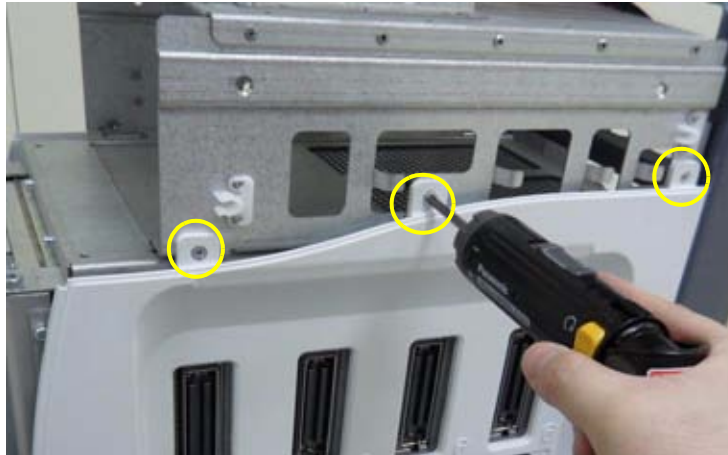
Unscrew 3 screws to remove SIDE COVER R ASSY
